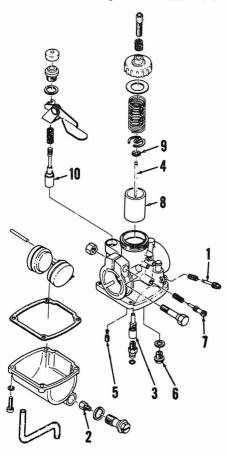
Exploded view of carburetor used on HT-1 models.
